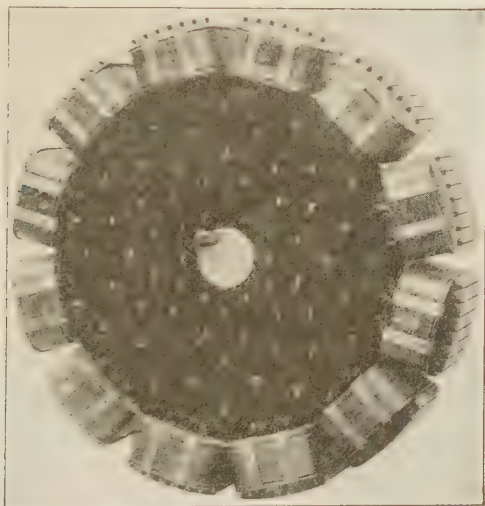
Twelve-pole, 600-r.p.m. rotor.
